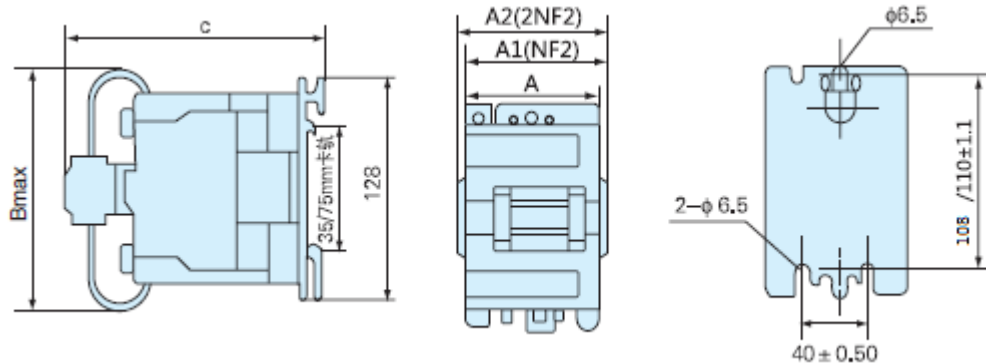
NDK1-50, 60, 125 External Dimensions and Installation Dimensions
